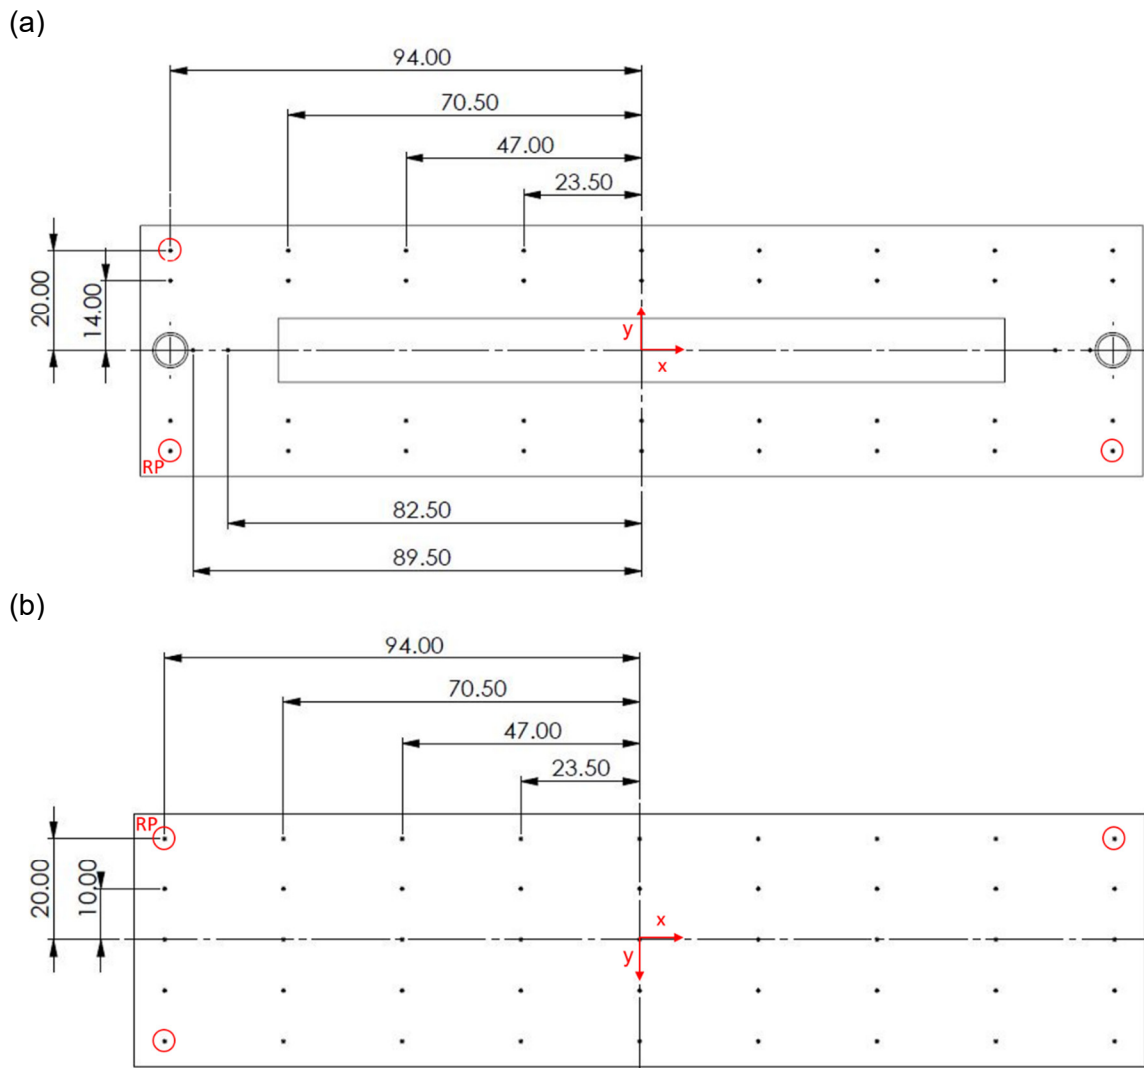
Schematic view of CMM points on the (a) top surface, and (b) bottom surface of the baseplate
